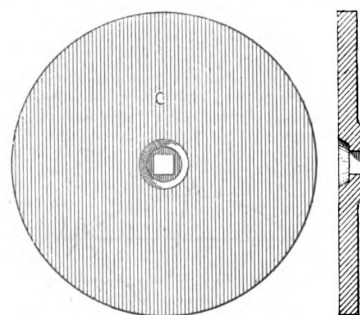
Face and Sectional Views of Eccentric Chuck.
